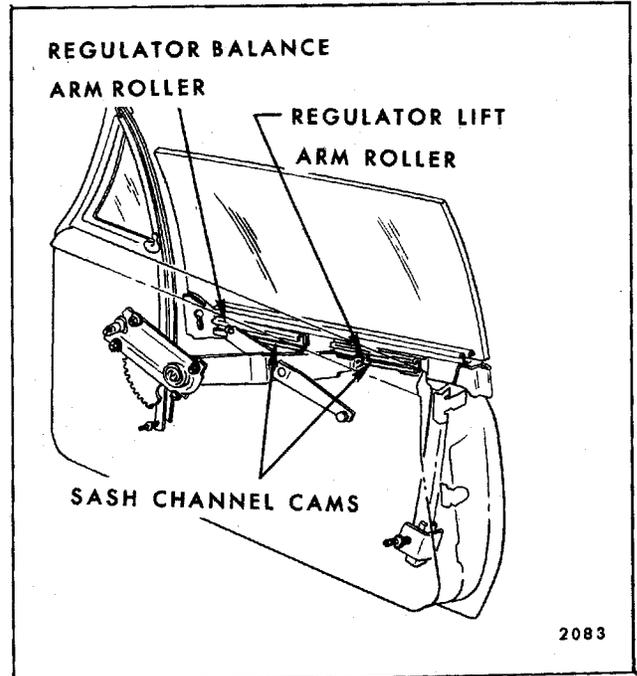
Front Door Window Installation - Buick, Oldsmobile, Pontiac "A-17 and 67" Styles
